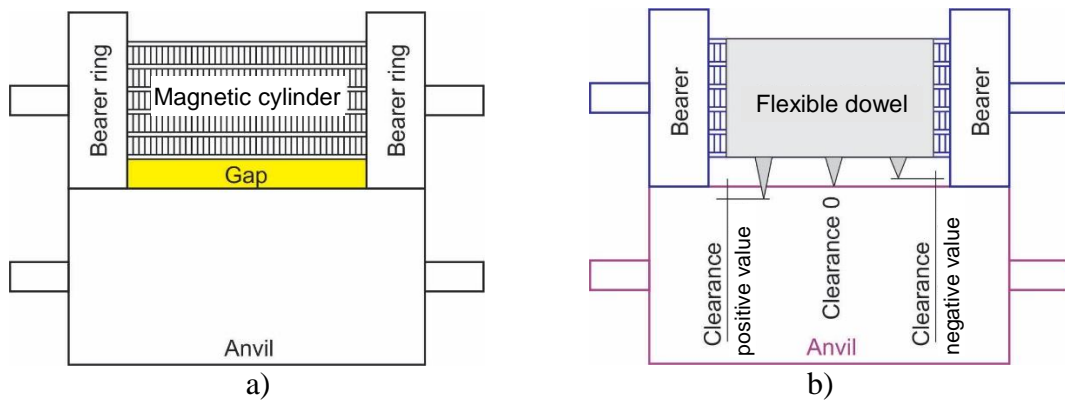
Die-cutting unit parameters: a) gap definition; b) clearance definition.
